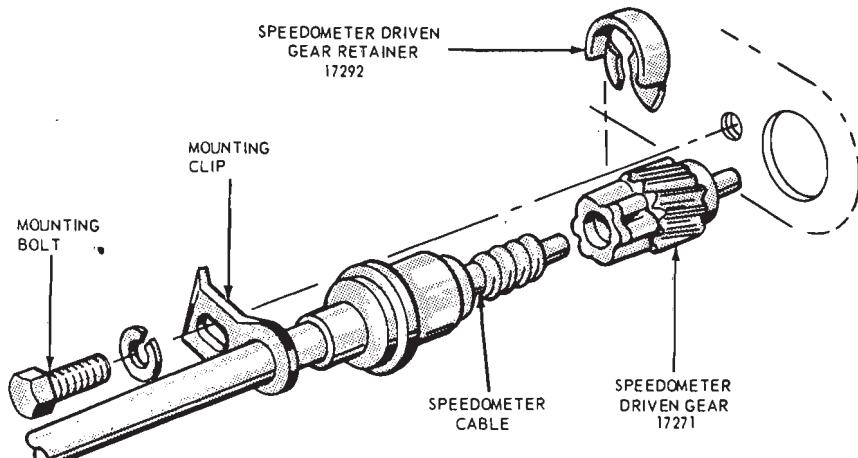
Speedometer Driven Gear Retainer and Mounting at Transmission
